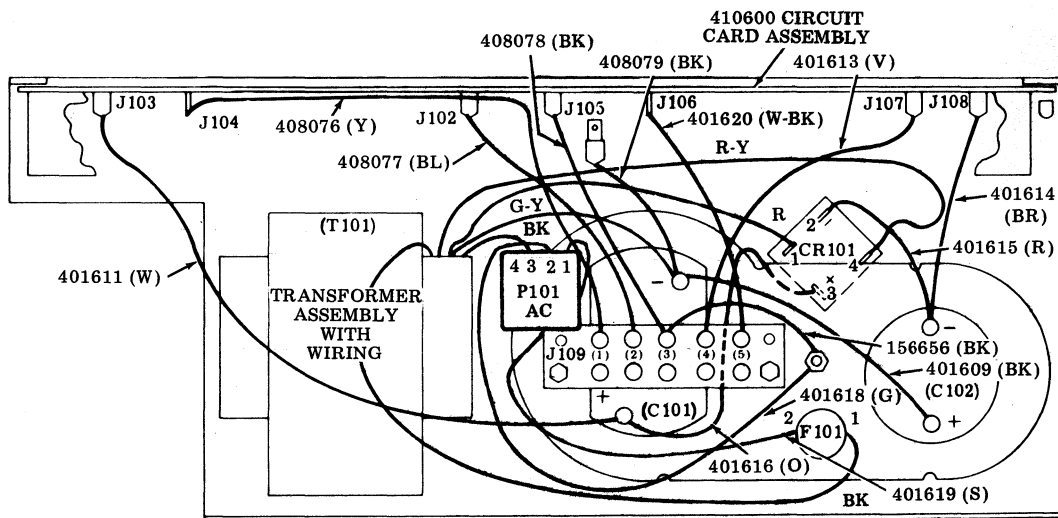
410600 Circuit Card Assembly (Late Design) Customer Identification Issue 6A or Later
